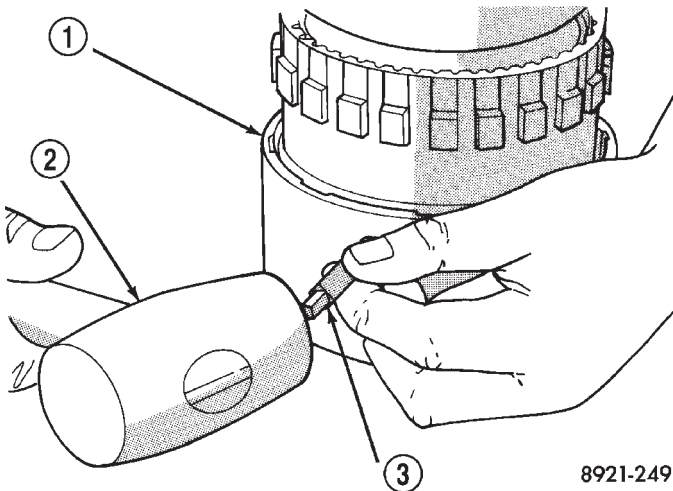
Overrunning Clutch Assembly Removal/Installation
